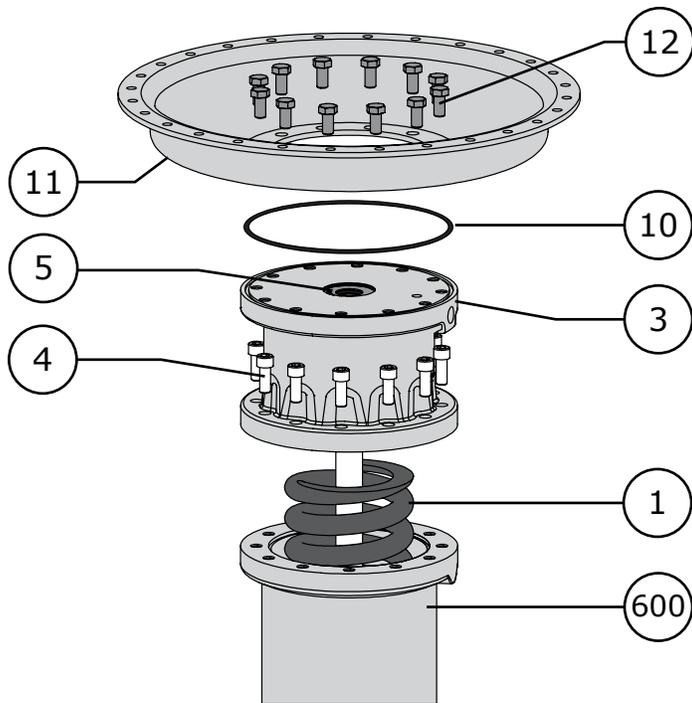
3220 SMHW Lower Casing/Adapter Removal
